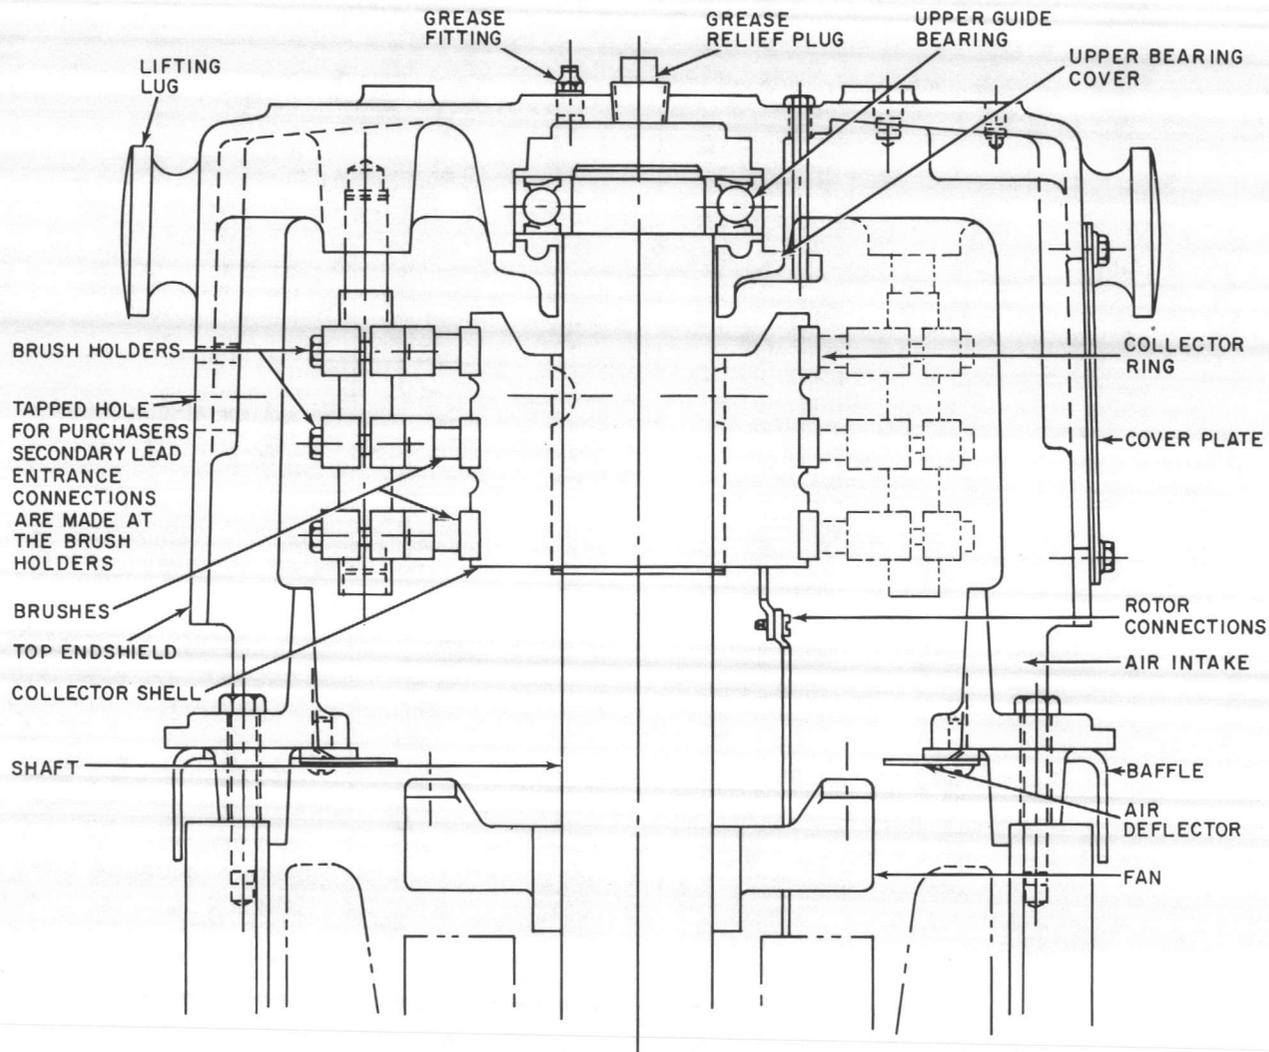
Typical wound-rotor-type motor, showing rings, brushes, etc.
